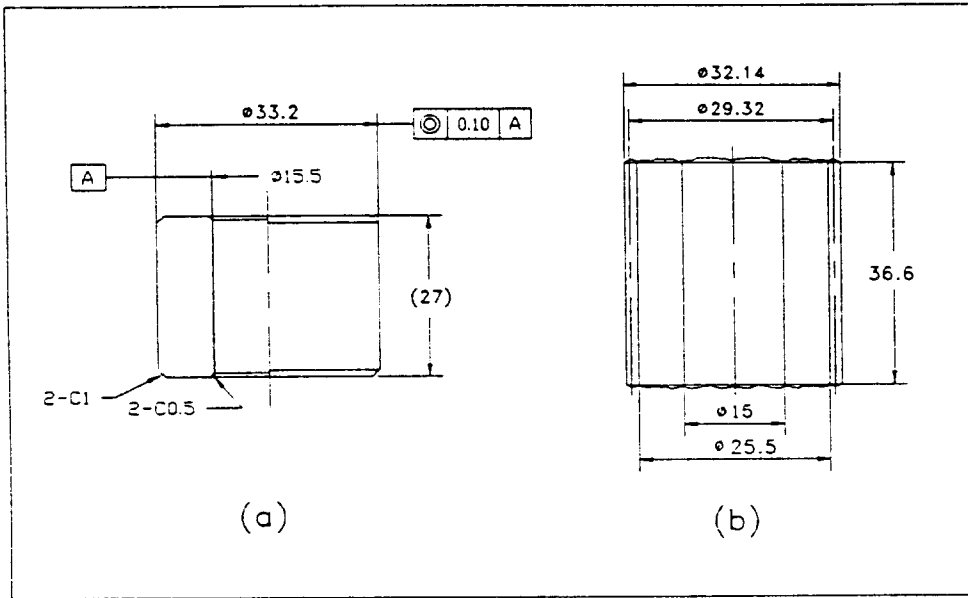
Drawings of (a) billet, (b) extruded helical gear
